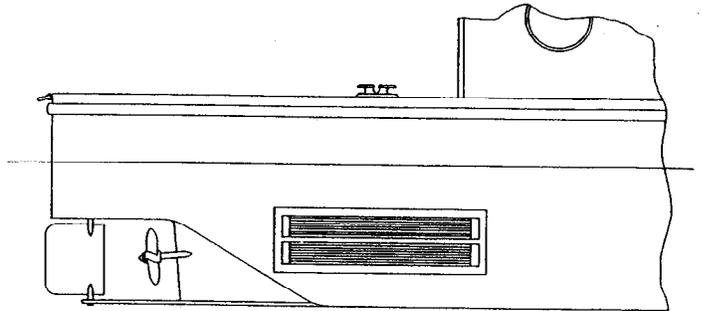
Side mounted GRIDCOOLERS well below water line.
